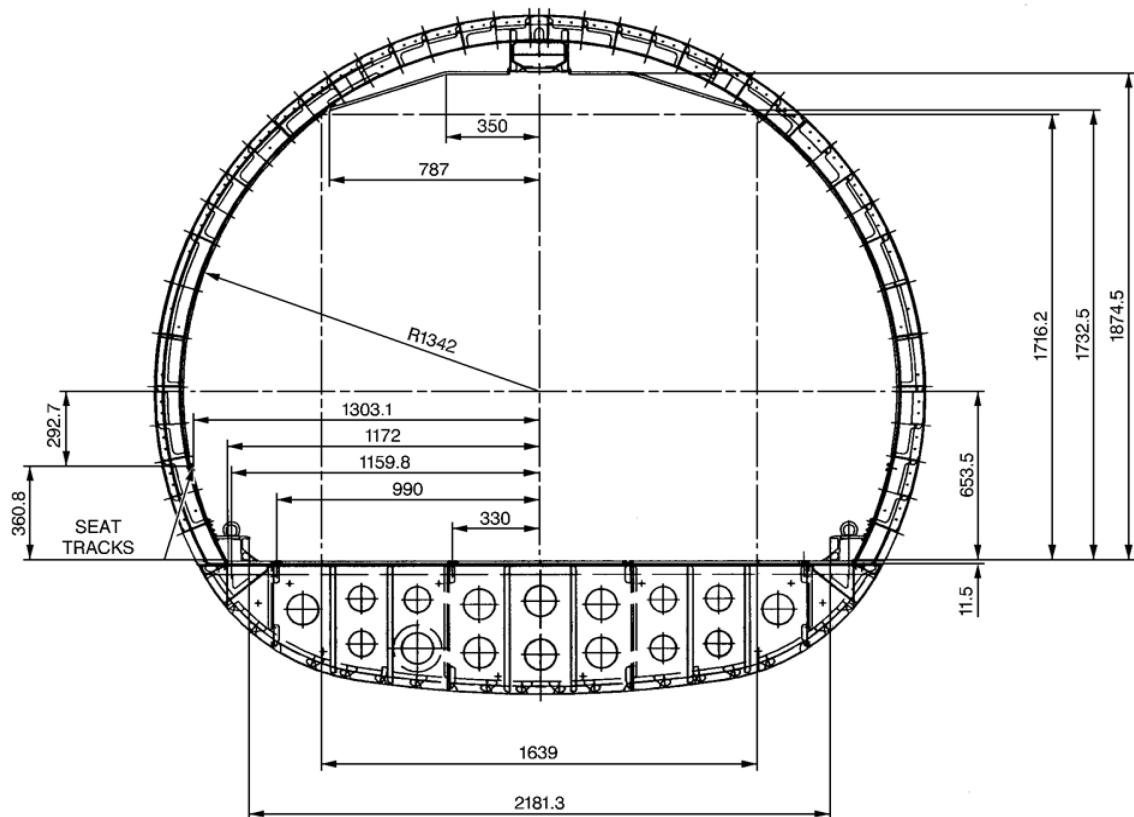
Cargo cabin dimensions (Sheet 1 of 5)
